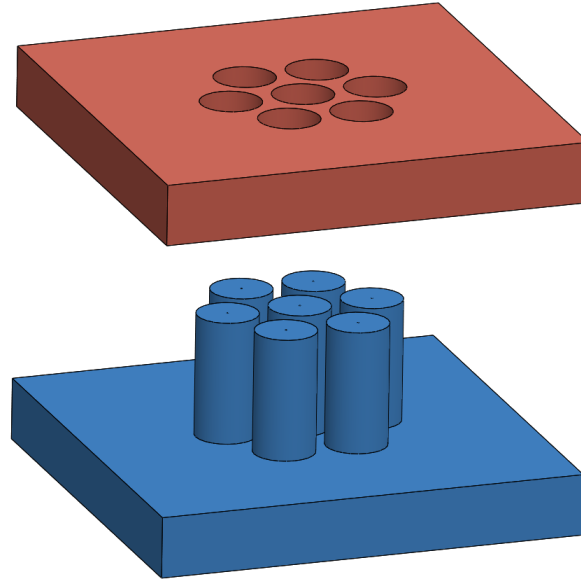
Red top plate with seven holes and blue bottom plate with seven pins and air inlet.
